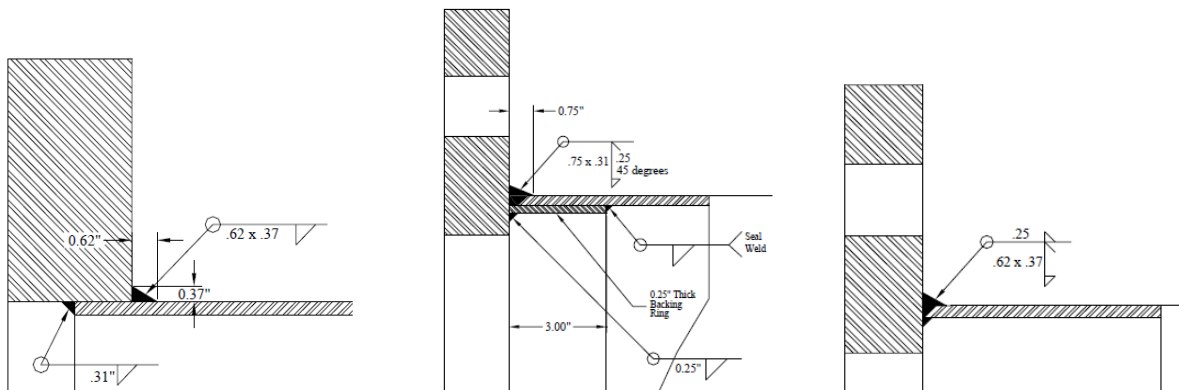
Drawings of fillet welded socket connection, Wyoming CJP connection, and Texas CJP connection (Rios, 2007)
